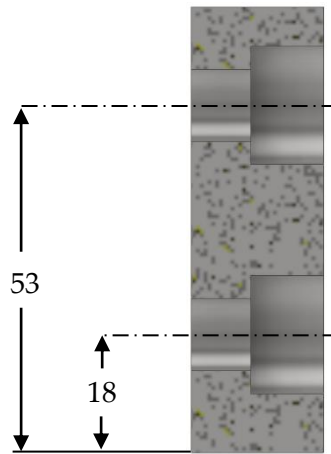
Lateral section of the frontal bearings supporting plate.
